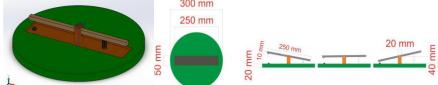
G-6 Telegraph Machine Dimensions for land communications How Telegraph Machines will be used:
